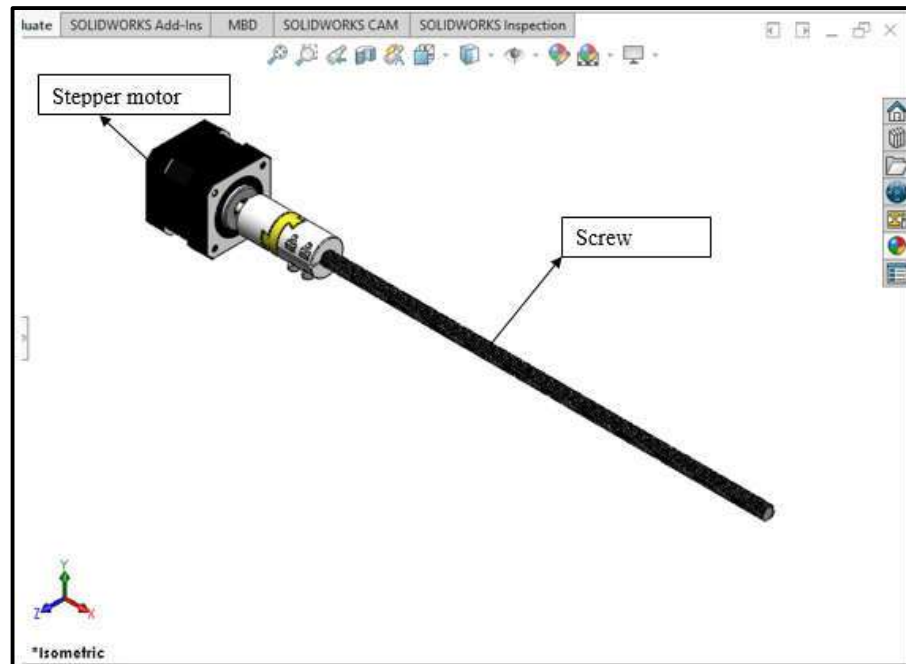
Sub Assembly of Extrusion System with Stepper Motor and T8 Screw
